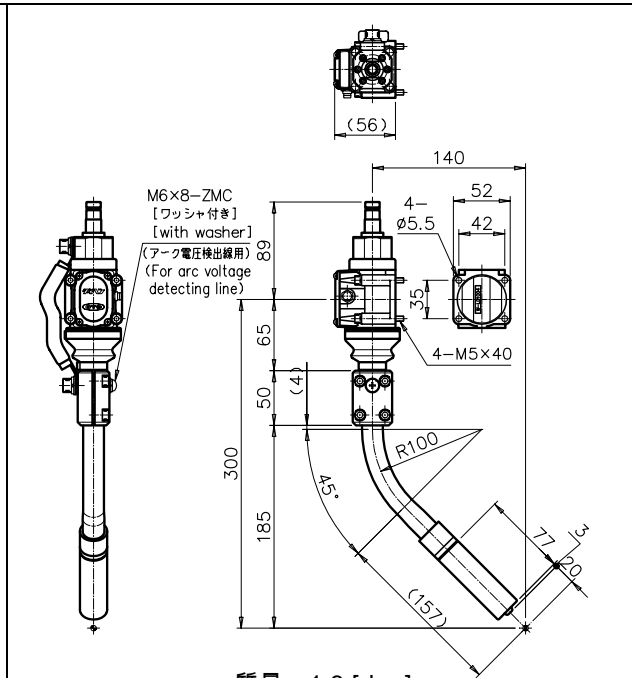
Outline drawing of air-cooled 350A torch Unit (mm)
